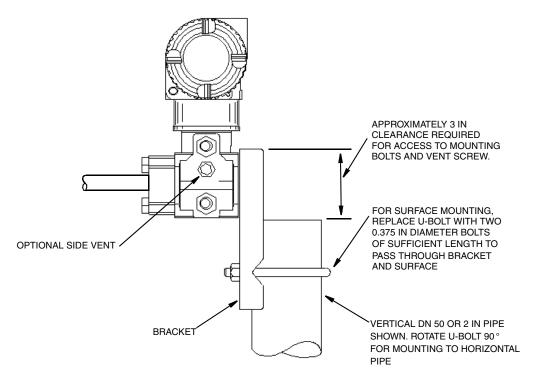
Pipe or Surface Mounted Transmitter Using a Standard Bracket
